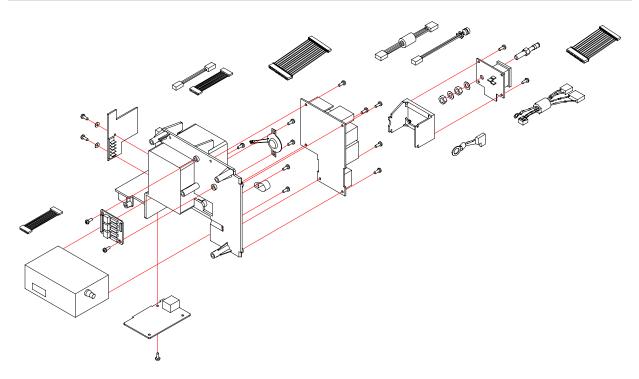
Rear Case Disassembly - SMPS, AC Inlet, Speaker, ECG Arrester Board, Printer Interface Board, TCP/IP Board, NIBP Module
